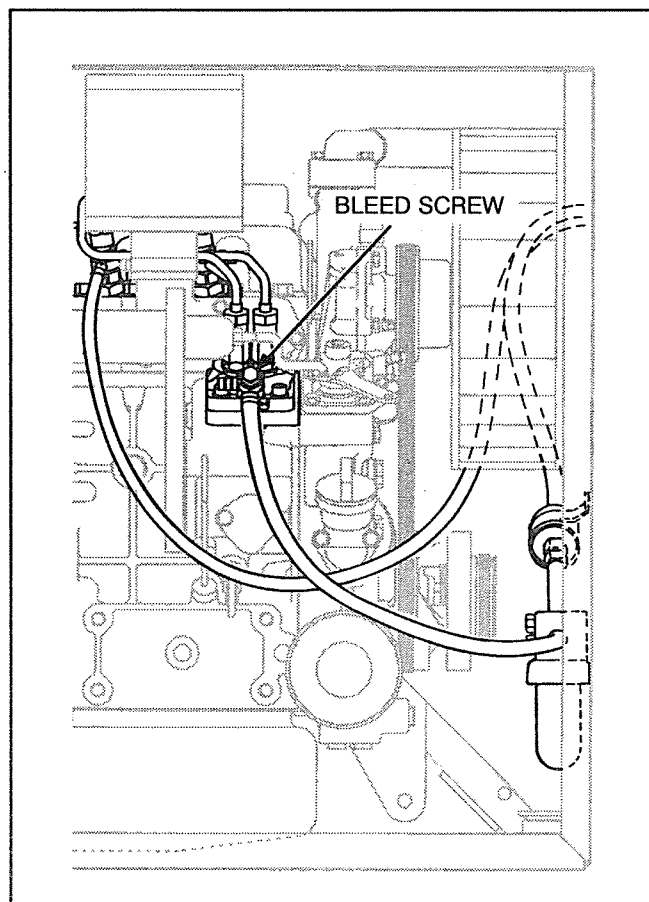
BLEED SCREW ON THE INJECTOR HOUSING
